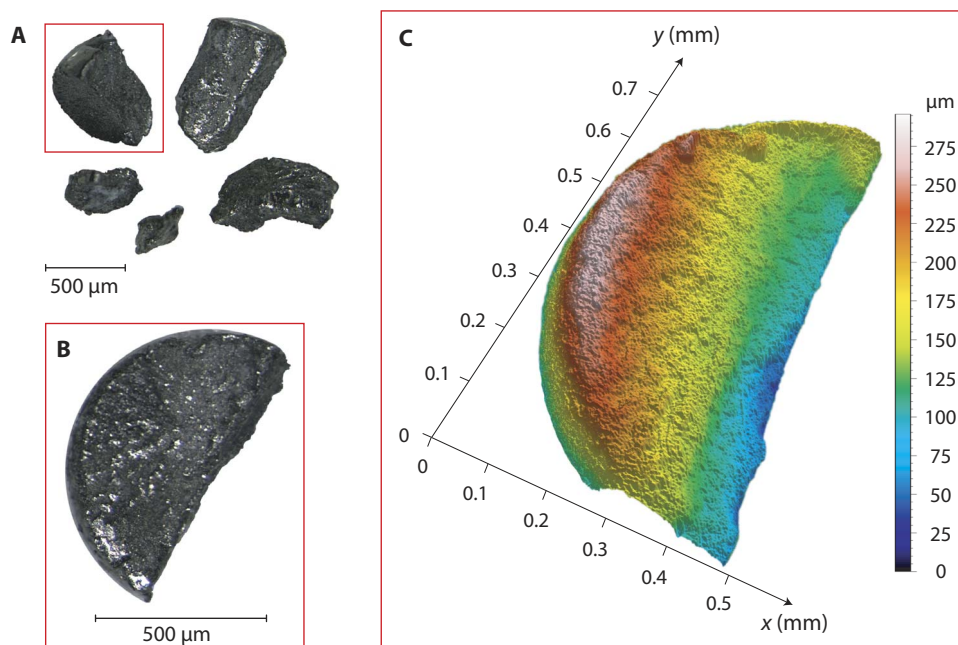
Microscope images of exploded rotor fragments. (A) Overview of recovered larger wedge-shaped rotor fragments of a 0.8-mm-diameter rotor. (B) Detailed view of one exemplary surface of the fragments (red box) exhibiting typical properties of mostly brittle failure. (C) Three-dimensional view of the same surface highlighting its structure.
